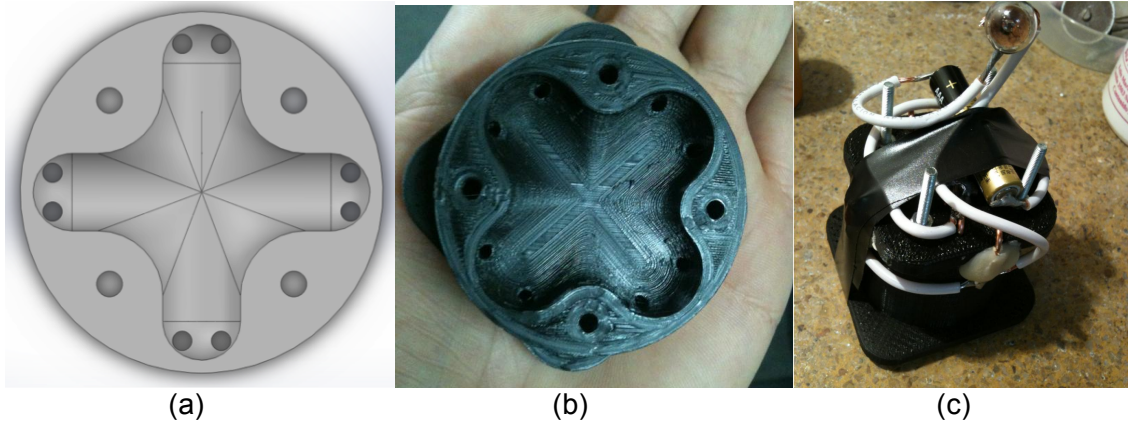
Rocket apogee detector, which was designed, constructed and implemented using digital fabrication tools. (a) CAD model. (b) 3D printed part. (c) Device assembled.
